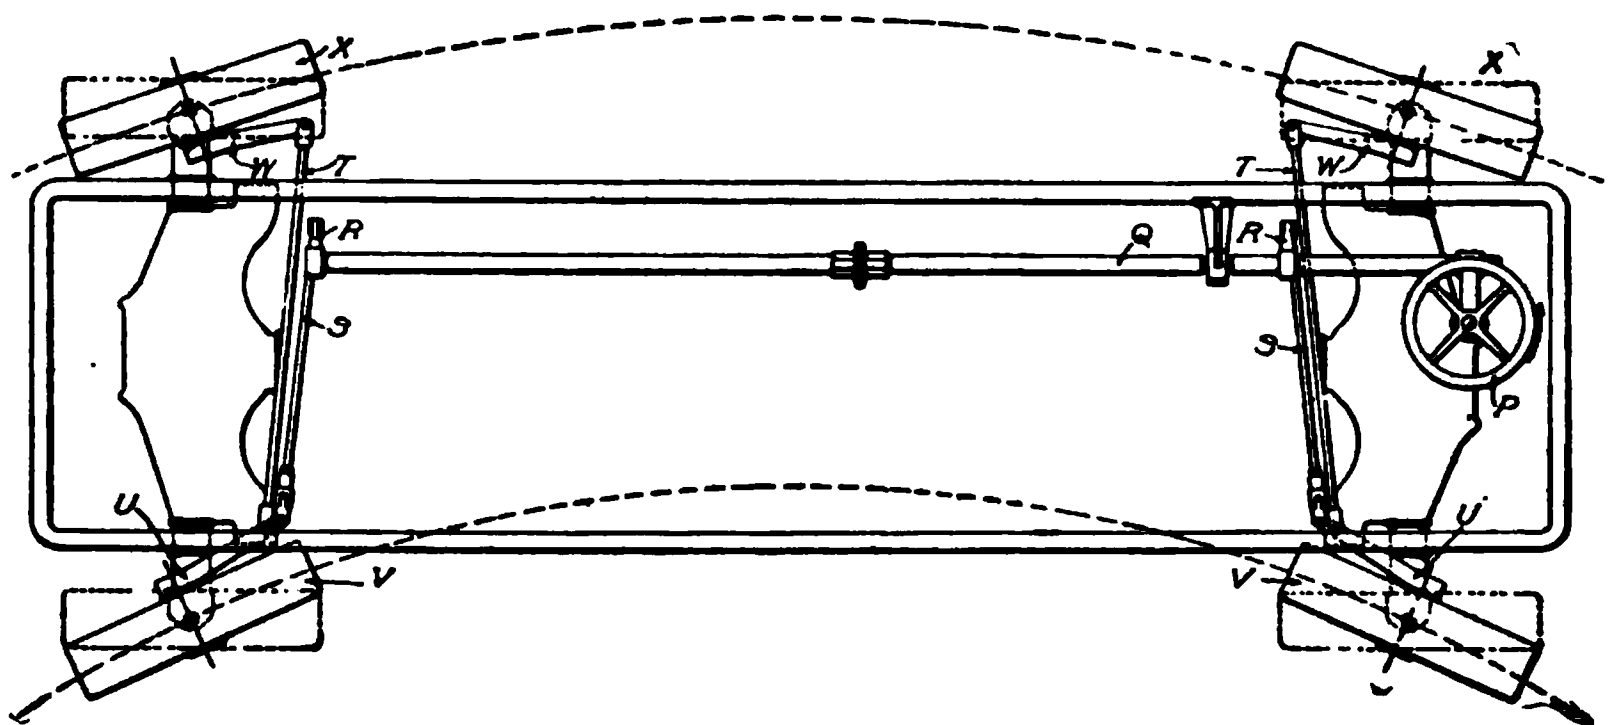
Diagram Showing Steering Action of a Four-Wheel Drive Truck
